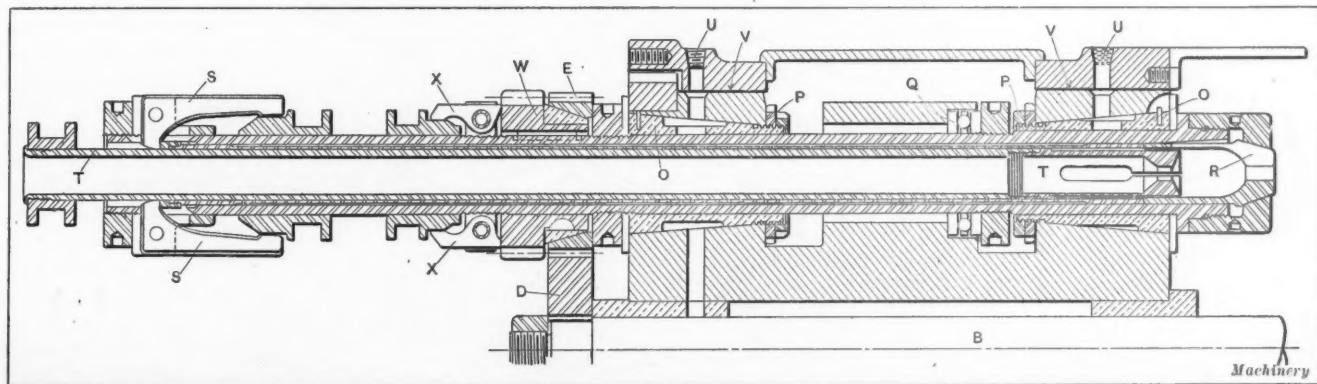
Cross-sectional View of One of the Six Spindles of New Britain Automatic Screw Machine
